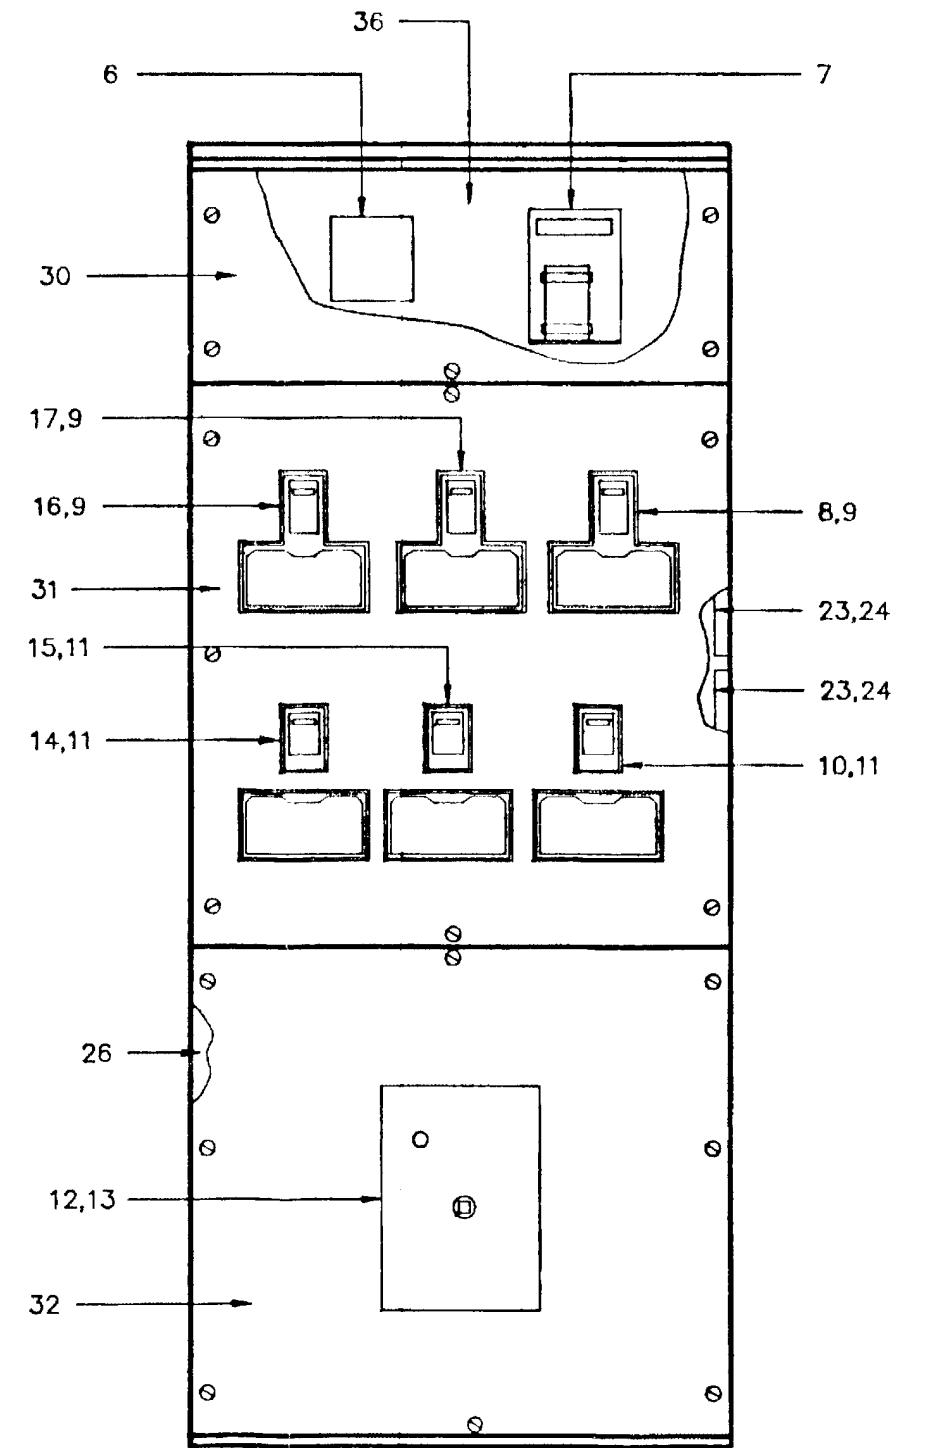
3SC Switchboard Assembly (Sheet 1 of 2)
